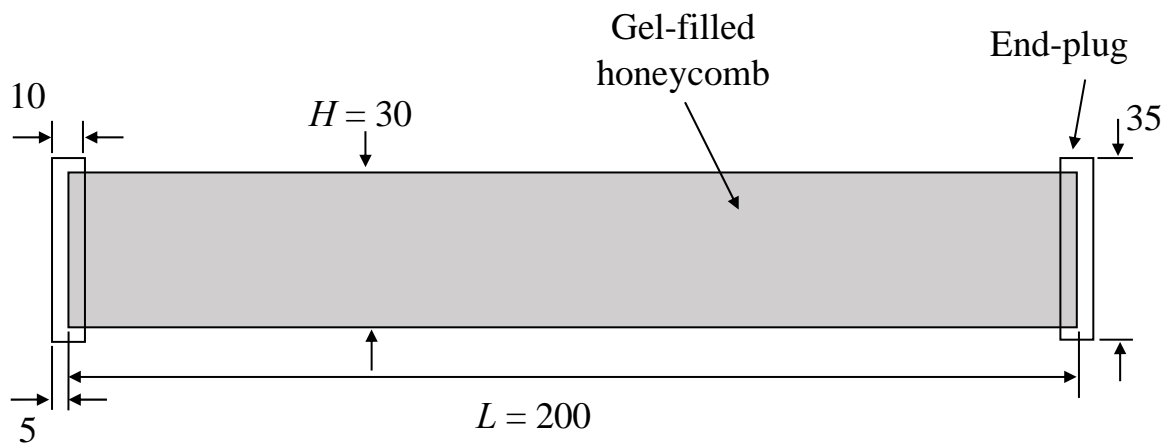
Sketch of the gel-filled end-plugged honeycomb specimens geometry prepared for pinching test. All dimensions are in mm.
